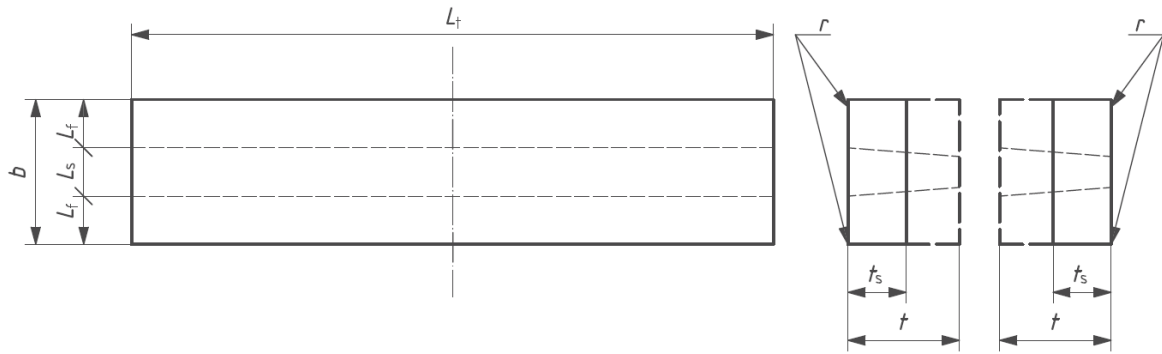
Longitudinal bend test specimen for a butt weld (LFBB and LRBB).
